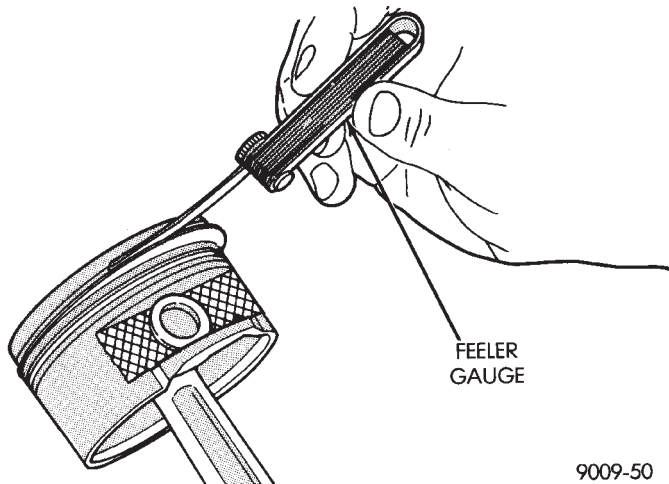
Measuring Piston Ring Side Clearance with an old bearing half. Do not file the rods or bearing caps.
